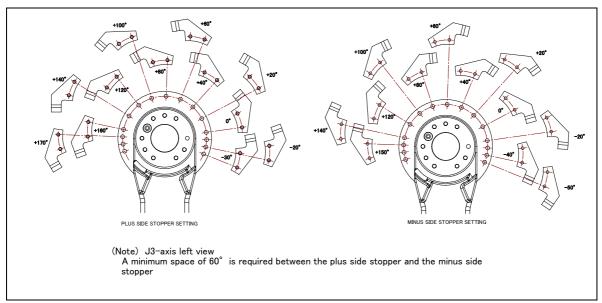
(e) Attachment of J3-Axis movable mechanical stopper
